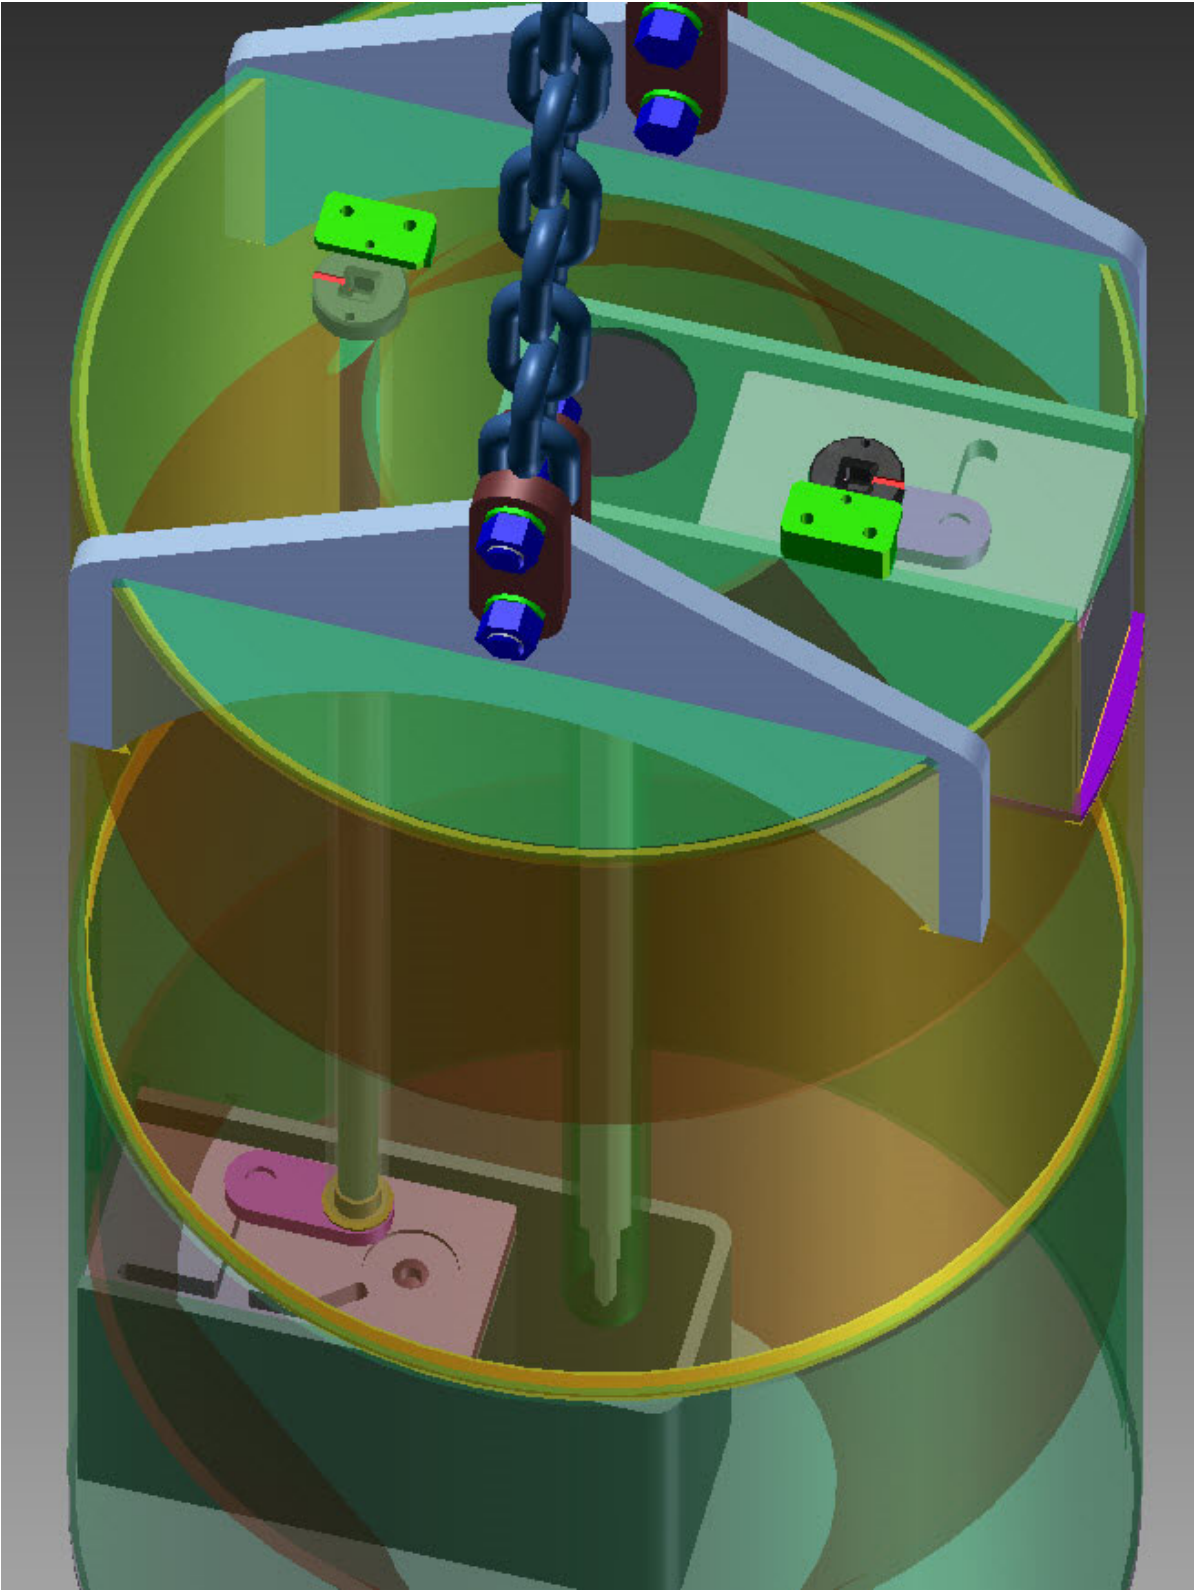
Translucent view of the fuel transfer cask showing the top and the bottom gates and the actuation mechanisms.
